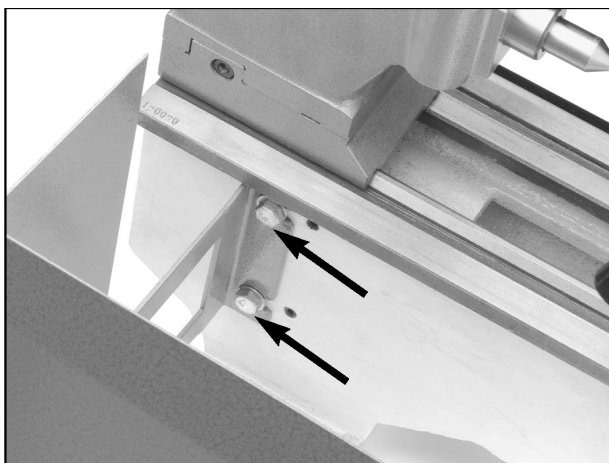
Two hex bolts / washers secure the right-hand side of the back splash to the lathe.
